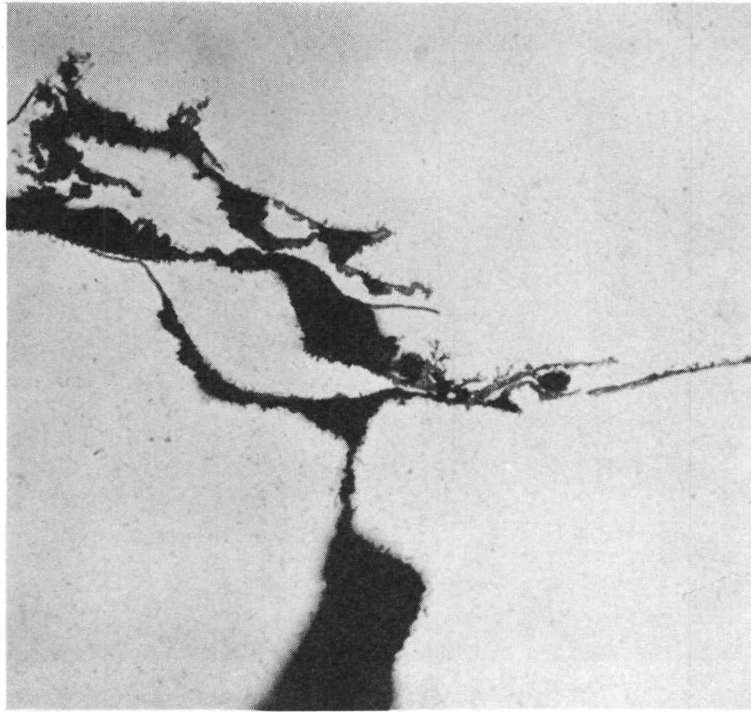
TIG WELD DEFECT IN SPECIMEN 1; MAGN 128X
